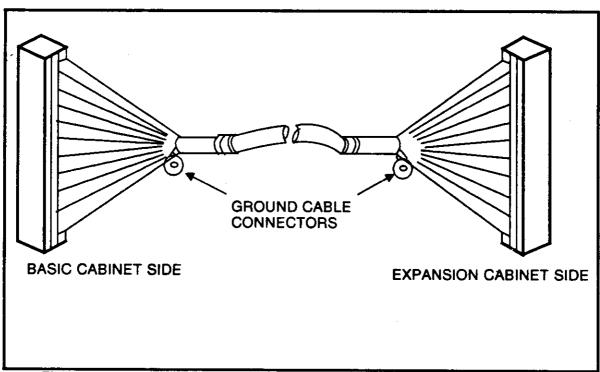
Inter-Module Cable Arrangement - Expanded System
